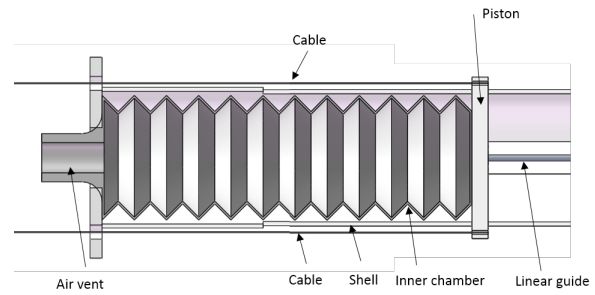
SHELINDER uses inner chamber to hold air, and is restrained by the outer shell. The pushing force is conveyed by driving piston upward who is also constrained by linear guideway.
